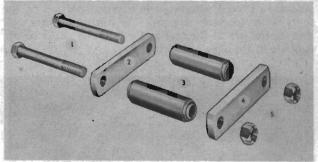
1. Bolts 3. Bushing 2. Inner plate 4. Outer plate 5. Nut
